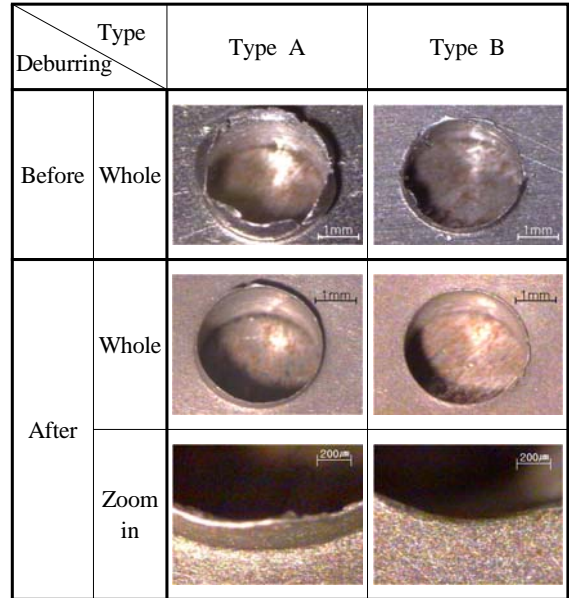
Measurement of Burr (Iron 6g, Abrasive 6g, Finishing time 10min, Motor 200rpm)
